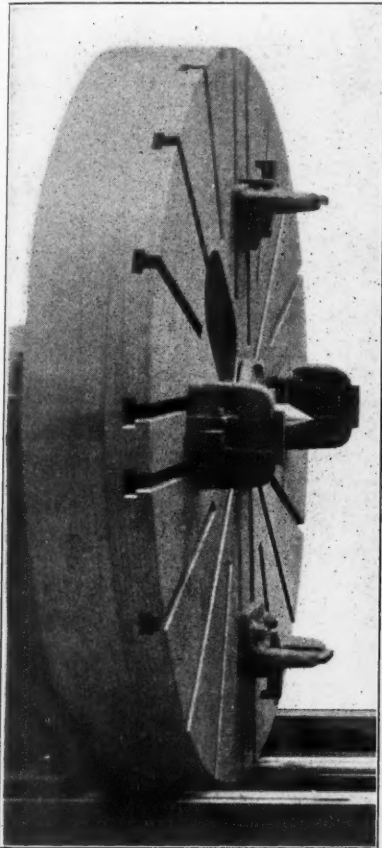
Face Plate of 90-in. Driving Wheel Lathe Showing "Sure Grip" Driver.
